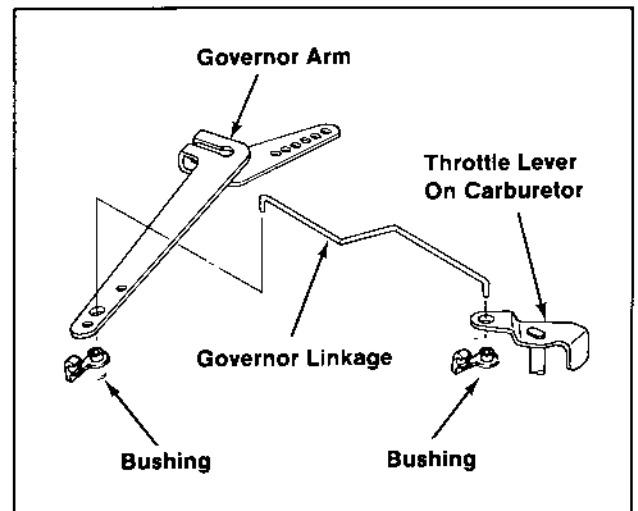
B-15. Installing Bushings And Governor Linkage -- M20 Engines.
